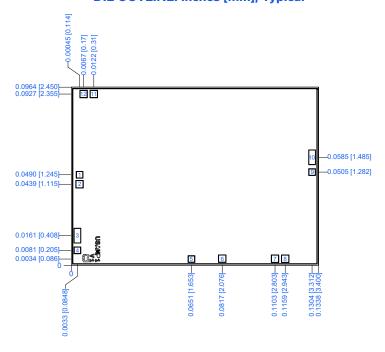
PMA5-83-2W-D+ Outline Drawing.
